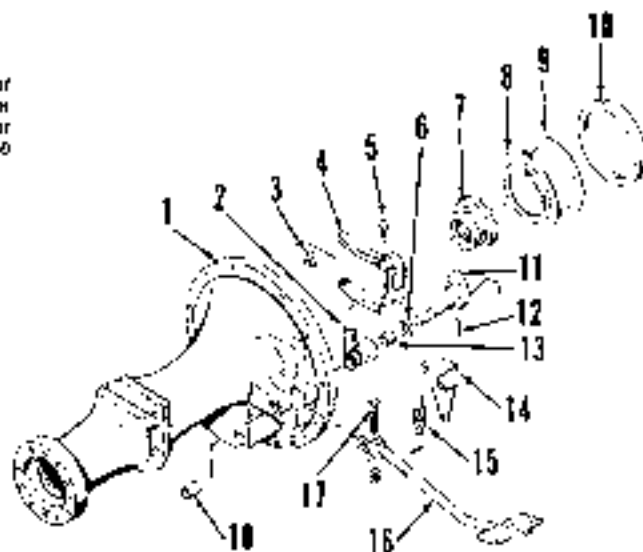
Exploded view of differential lock actuating mechanism and associated parts used on models with disc brakes.
